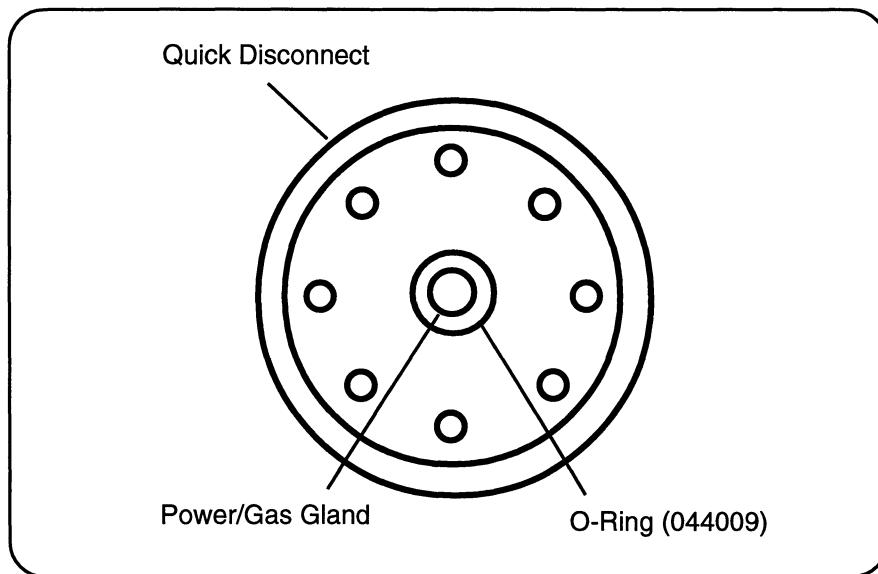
Quick Disconnect O-Ring Removal and Replacement
